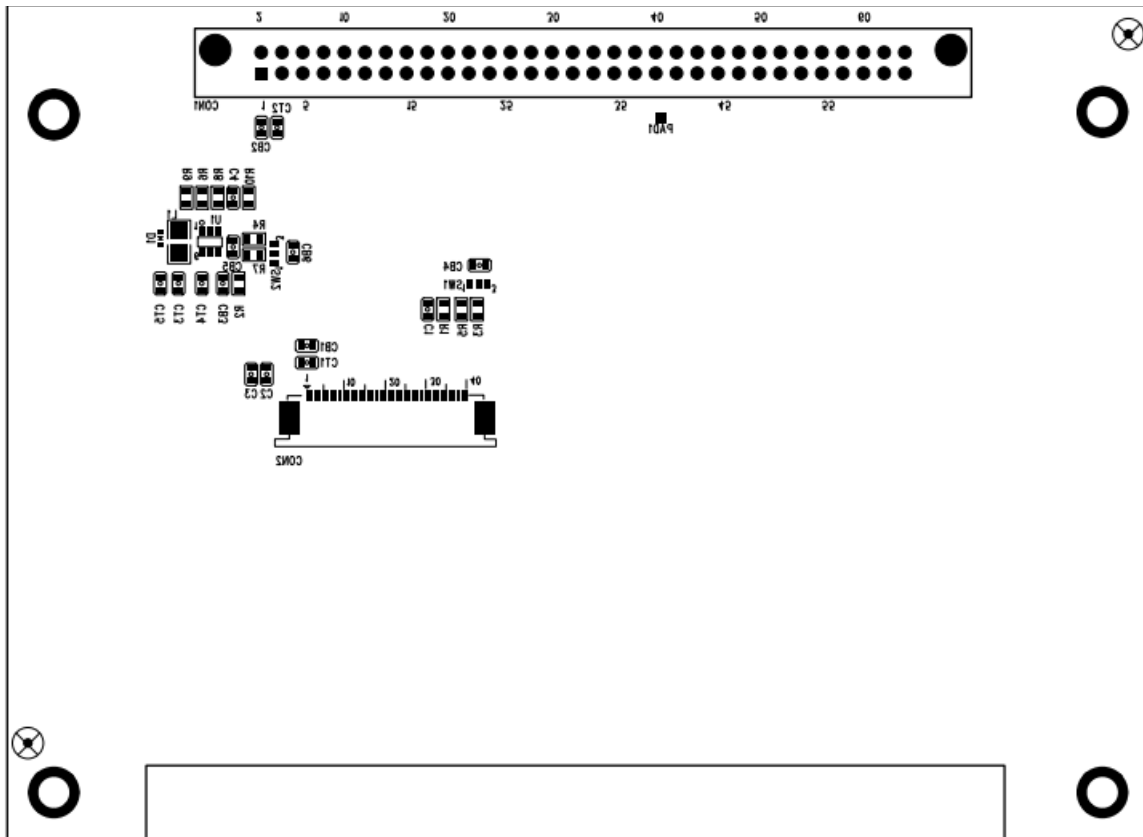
NuDesign-TFT-LCD5 Back PCB Placement
